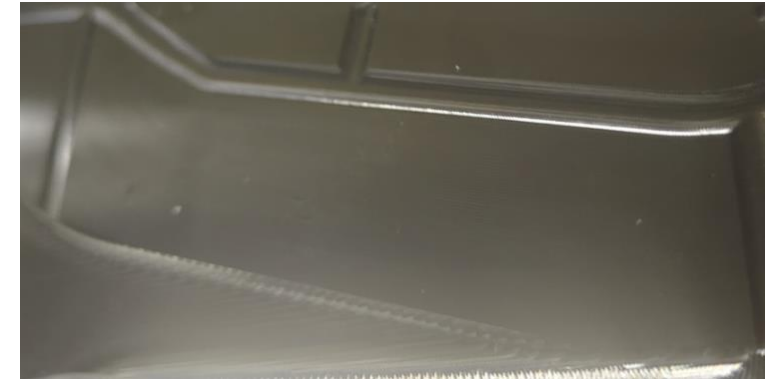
Workpiece Surface Effect After 12 Hours of Machining
